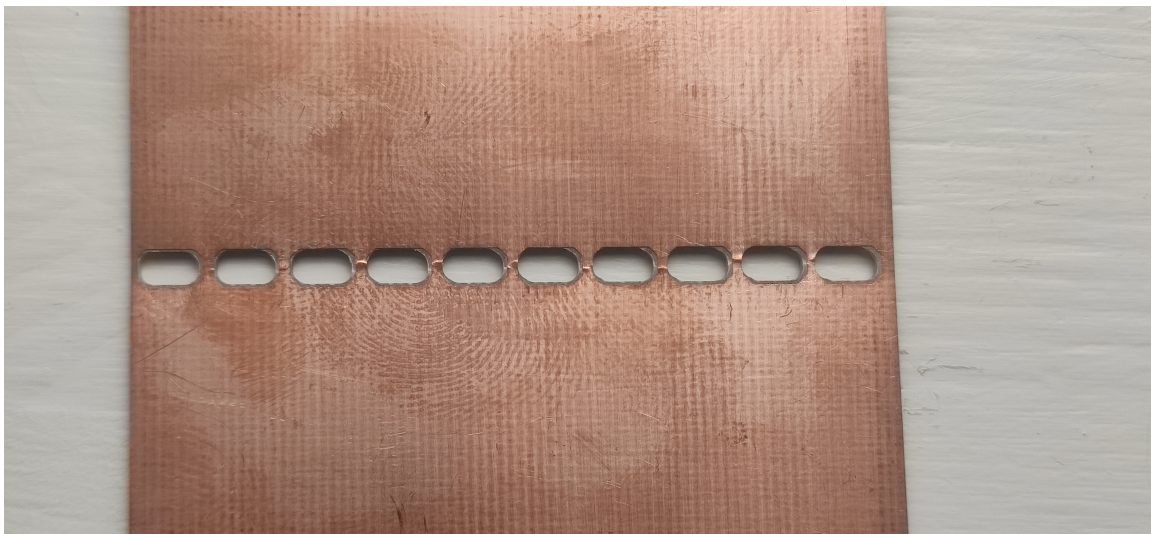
Top side of the mechanical test specimen "Eco5" after the three-point-bending test.
